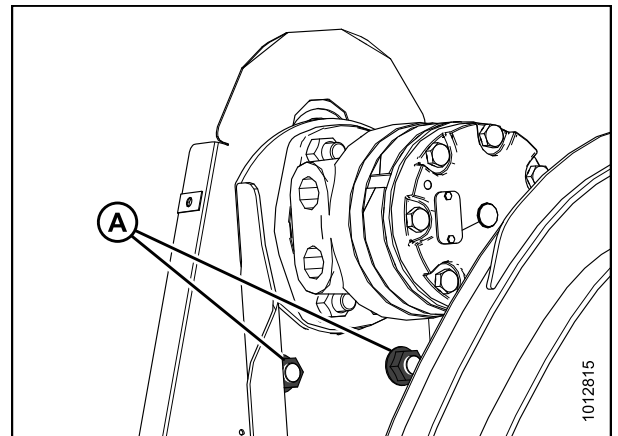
Single-Reel Drive Shown – Double Reel Similar
